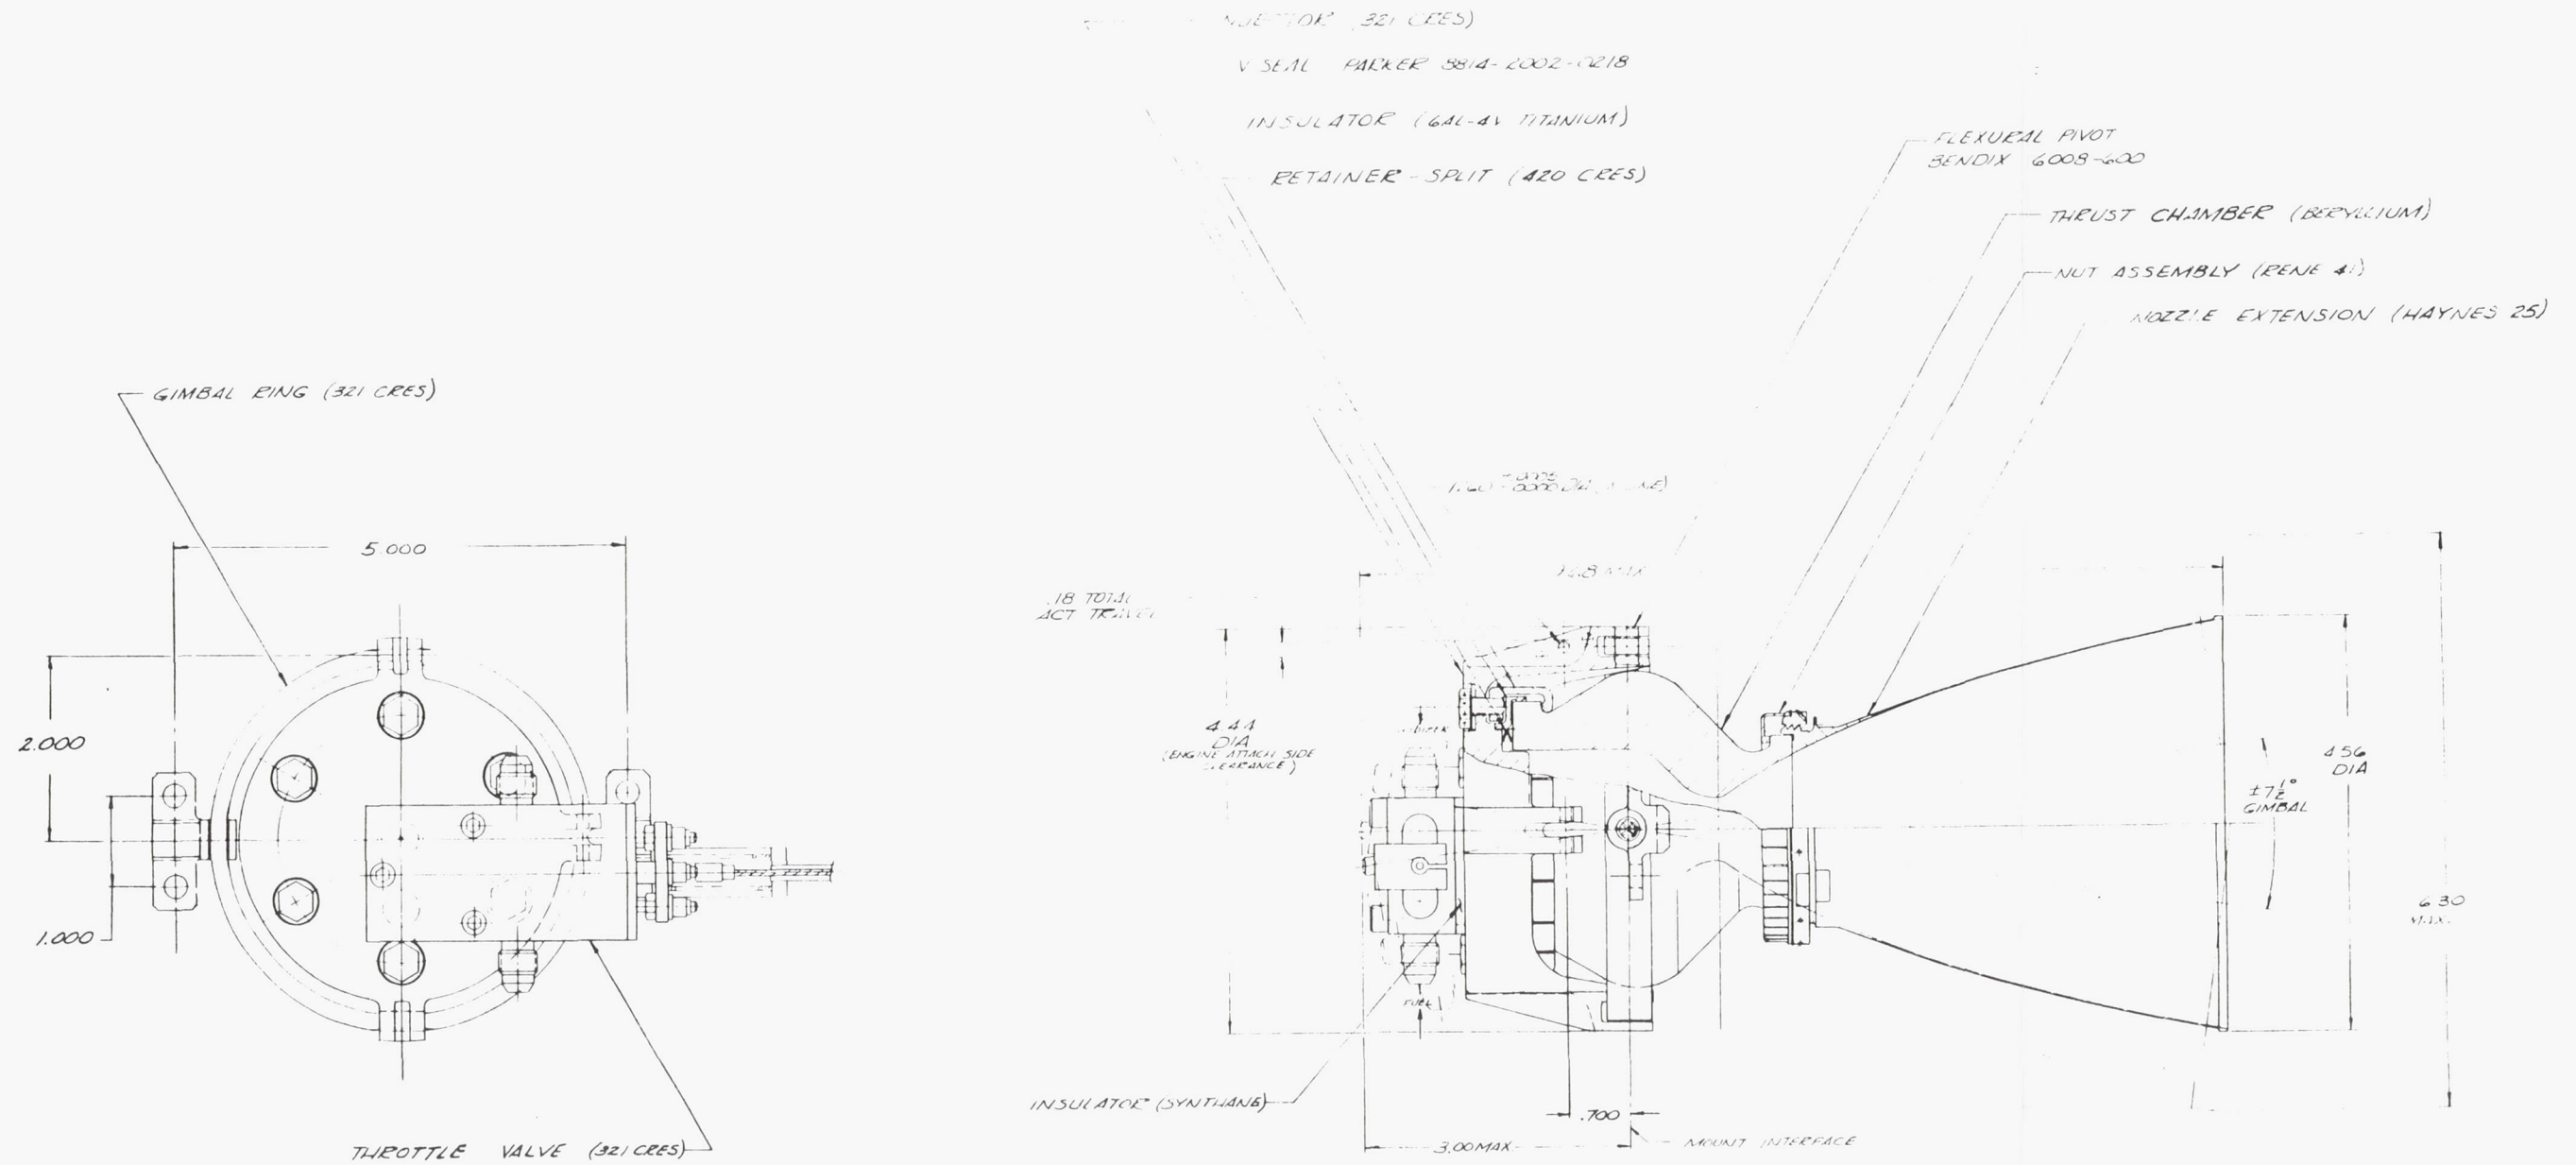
150-Pound Thrust Throttleable Rocket Engine Assembly
